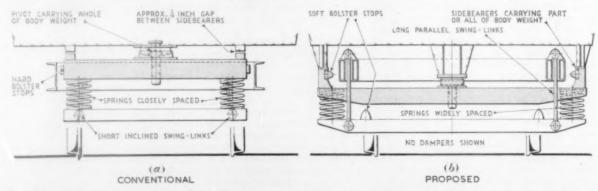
Comparative designs of bolster suspension showing, right, proposed construction for helping to reduce body rolling
